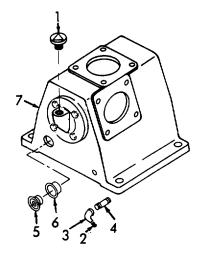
Oil Filler Cap, Plug, and Sight Gage, Removal.
